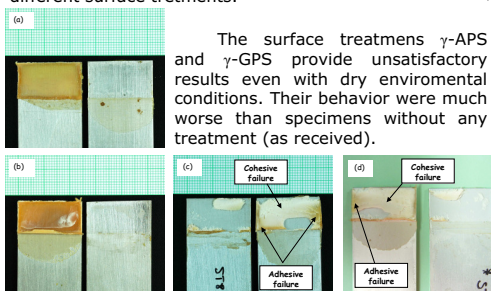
Fracture surfaces of test specimens after 30 days of cure at 95% HR and 50°C: a) γ-APS b) γ-GPS c) γ-MPS d) P2
